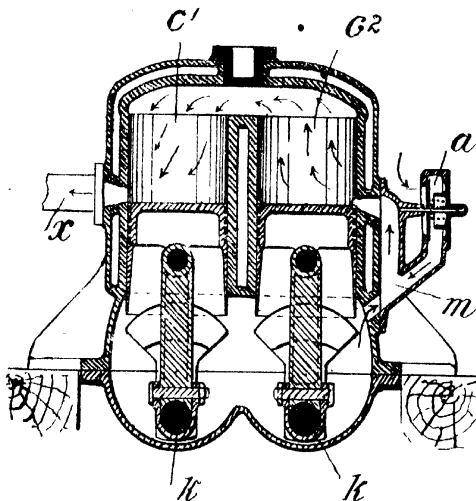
Two-stroke engine with twin cylinders and piston-controlled inlet and exhaust—Lucas
